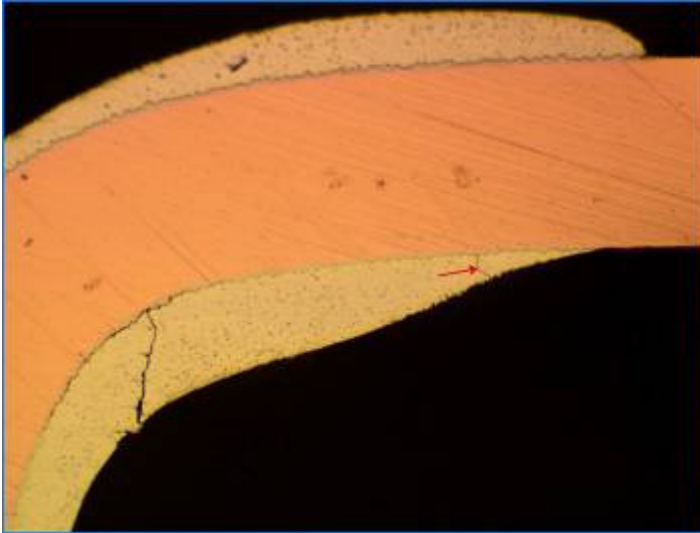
cross section, SN63, U41, left lead crack, 200xd
